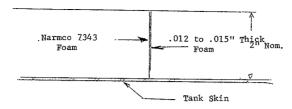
BUTT-TYPE CLOSE-OUT.
